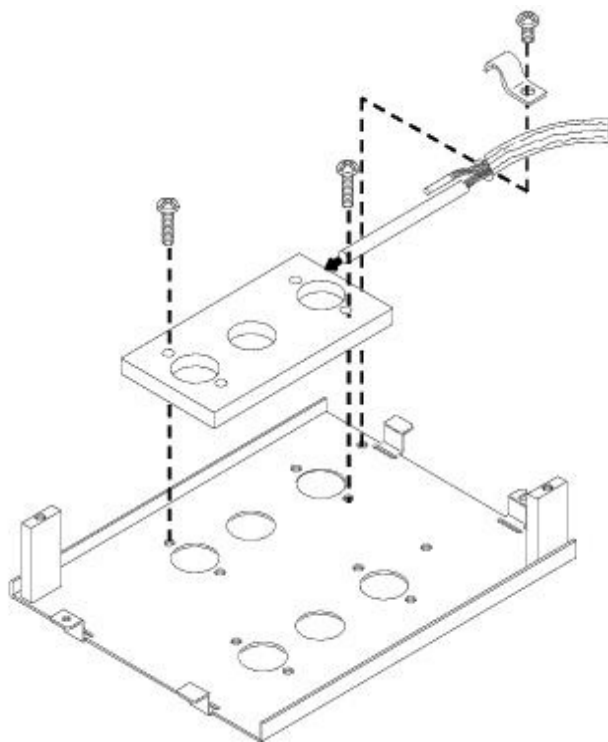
Removing the sheet metal cutout. 6890 shown.
